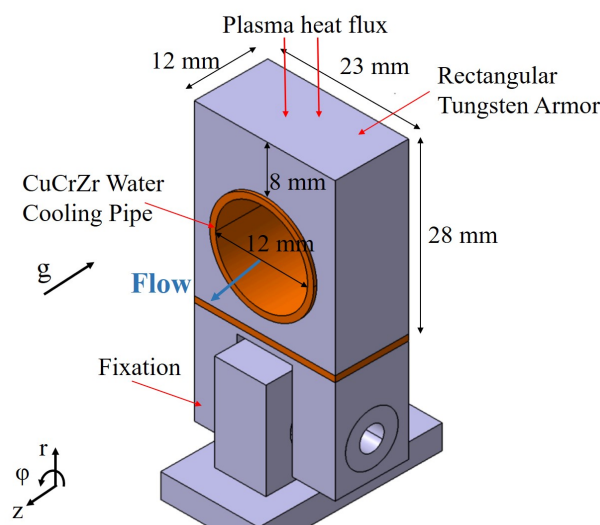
One base-line water coolant monoblock with dimensions of the original divertor cooling target.
